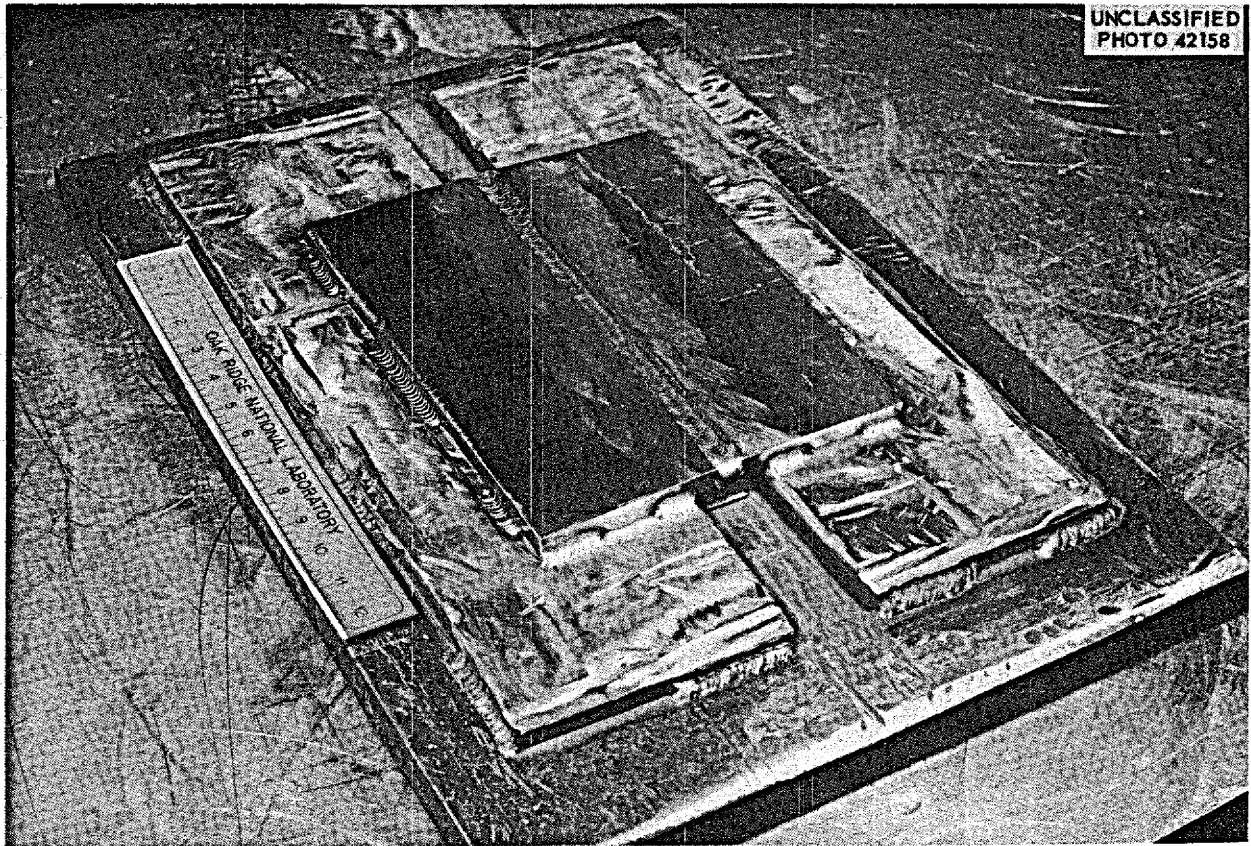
Weld Test Plate Assembly After Welding.
